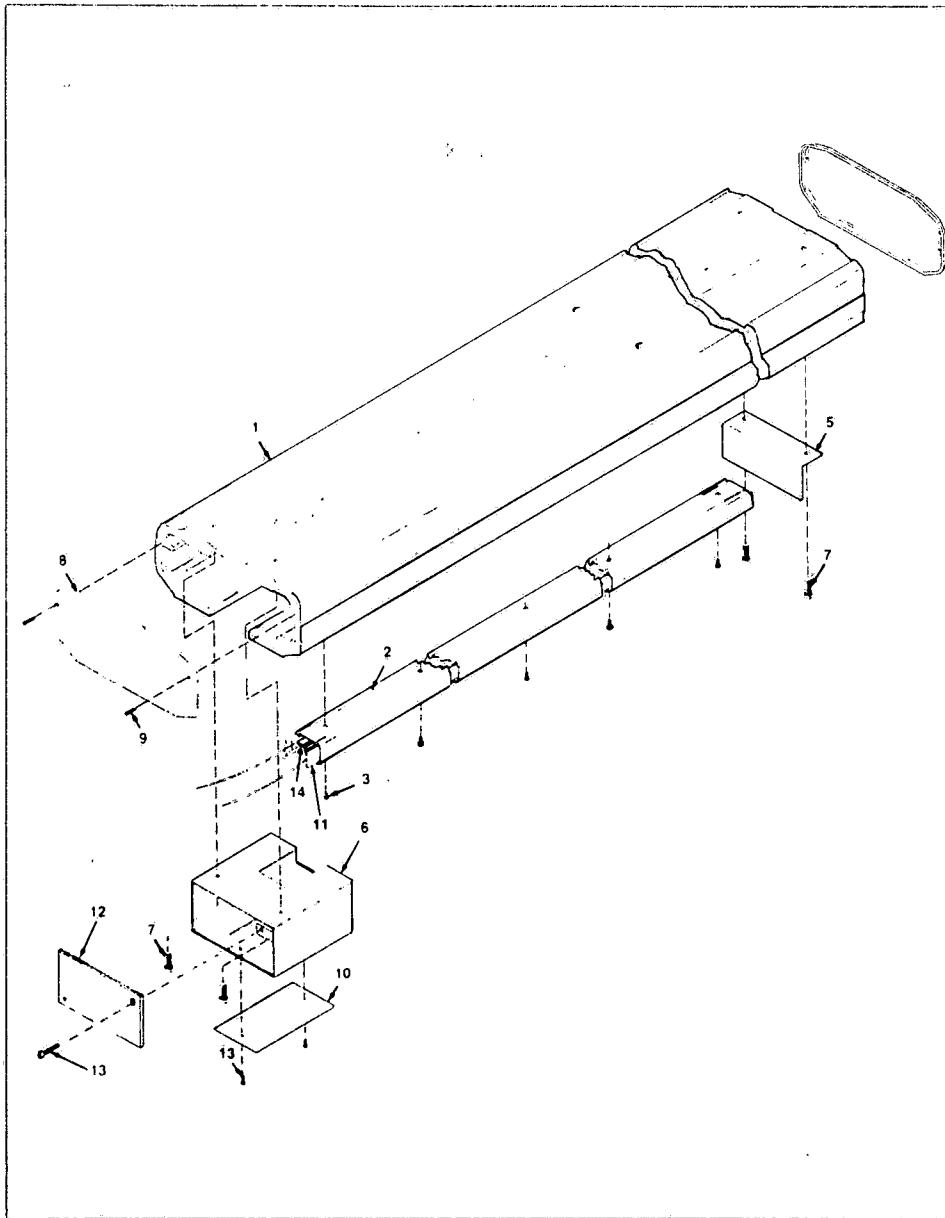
A — Track Assembly (For Equipment Shipped After 3/73).
